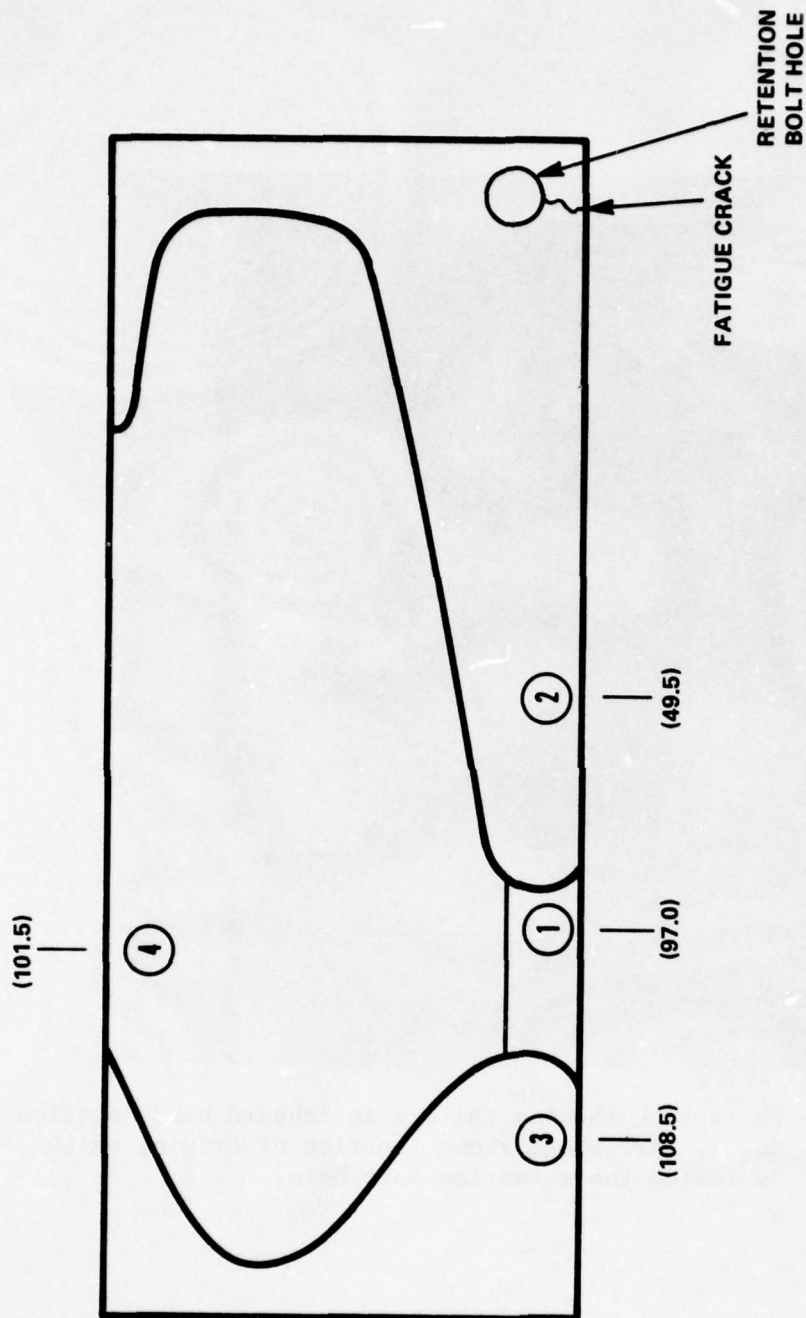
Sketch showing location of fatigue crack in inboard blade section No. 2. Numbers in parentheses represent distance from rotor system center in inches. Numbers in circles indicate transducer positions. Sketch shows blade top view; however, crack was located on underside of blade.
